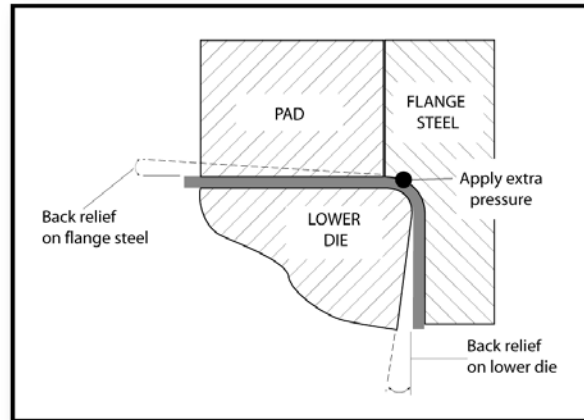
C-31: Over-bending is assisted when back relief is provided on the flange steel and lower die.^{A-2}
